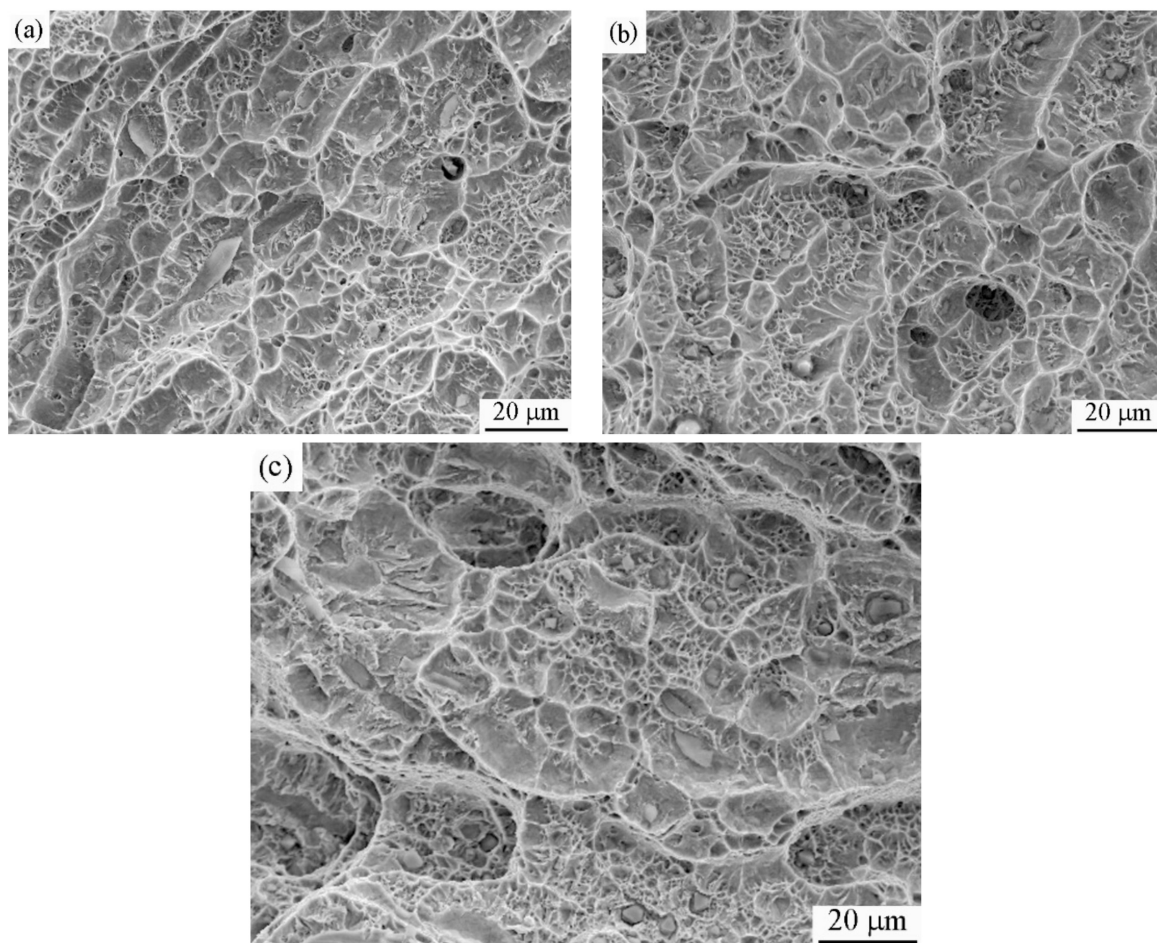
Tensile fracture surfaces: (a) Inconel 718 base metal, (b) Inconel 600 base metal, (c) Inconel 718/Inconel 600 dissimilar friction weld.
